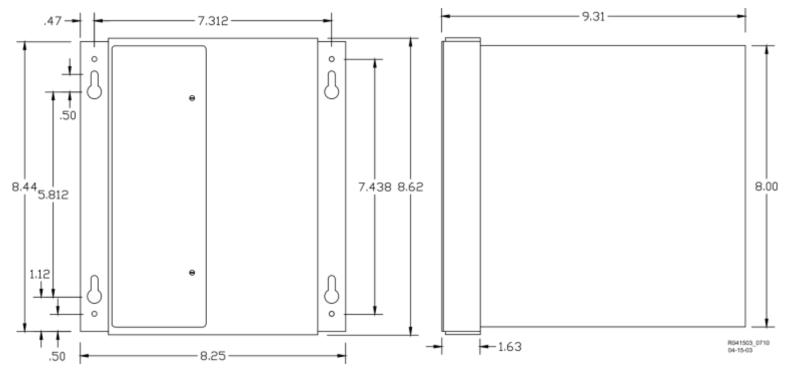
Bidirectional Simulation Coupler Assembly Mounting Dimensions
